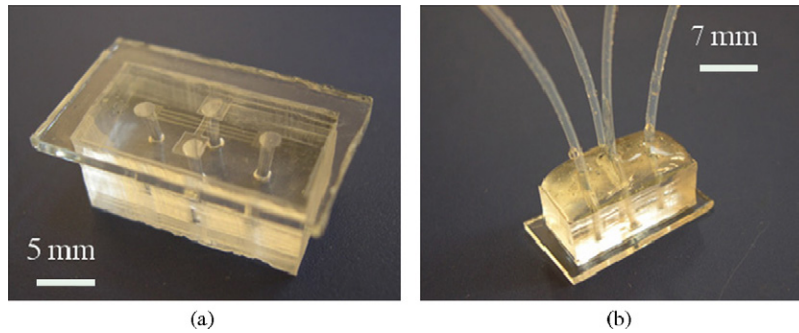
Images of a fabricated valve: (a) before and (b) after packaging.
